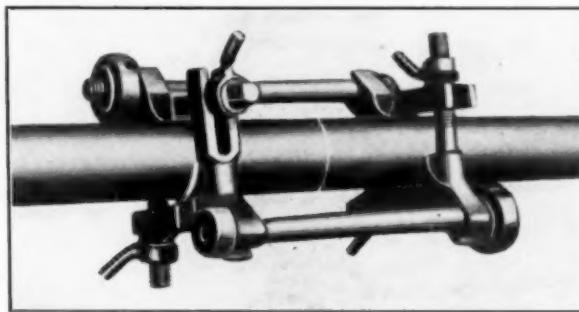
PIPE WELDING. PIPE HELD IN CLAMPS
